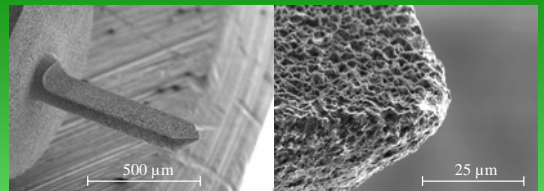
PCD Micro Drilling Tool machined with micro EDM
